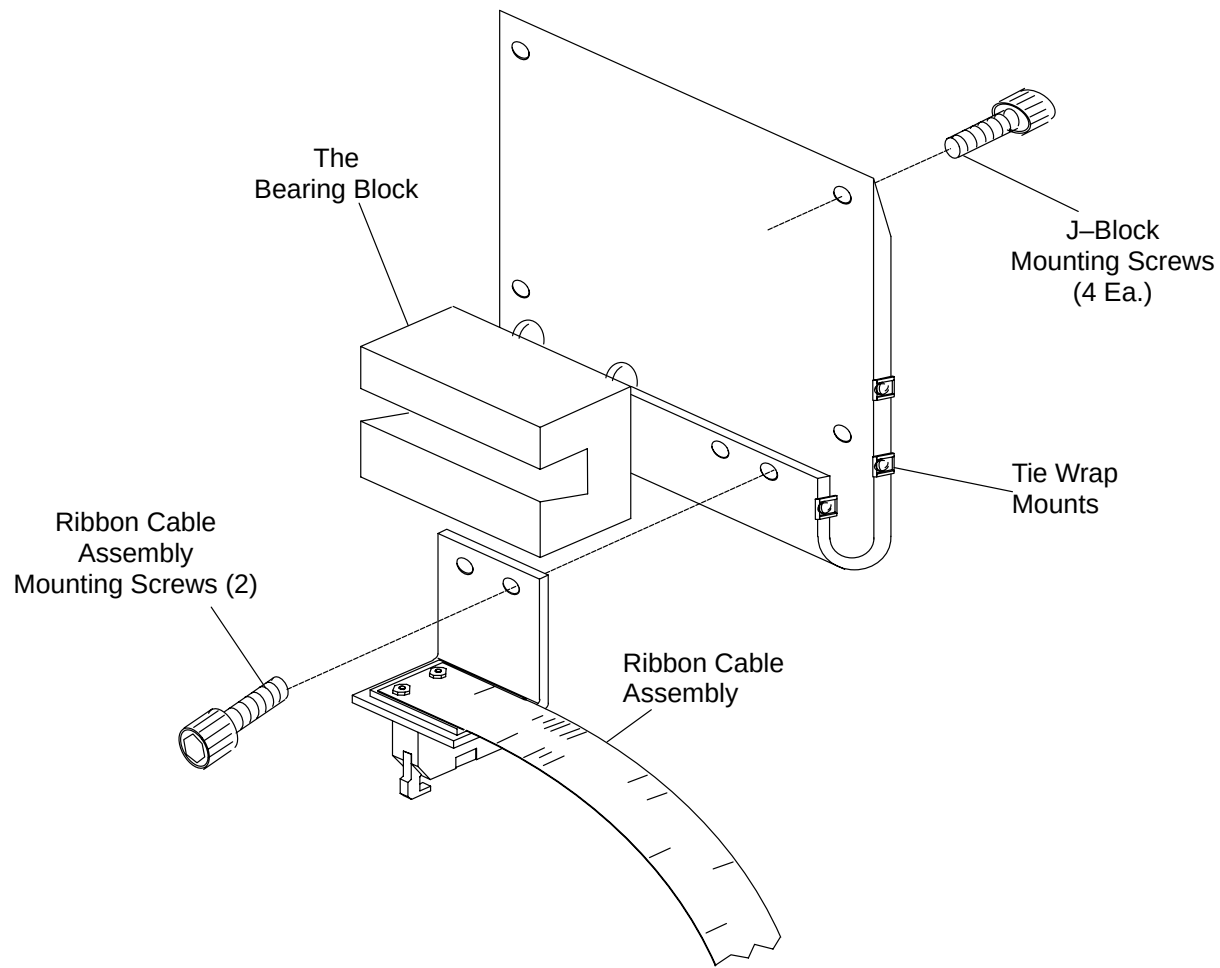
RIGHT REAR MOUNTING BLOCK ASSEMBLY
